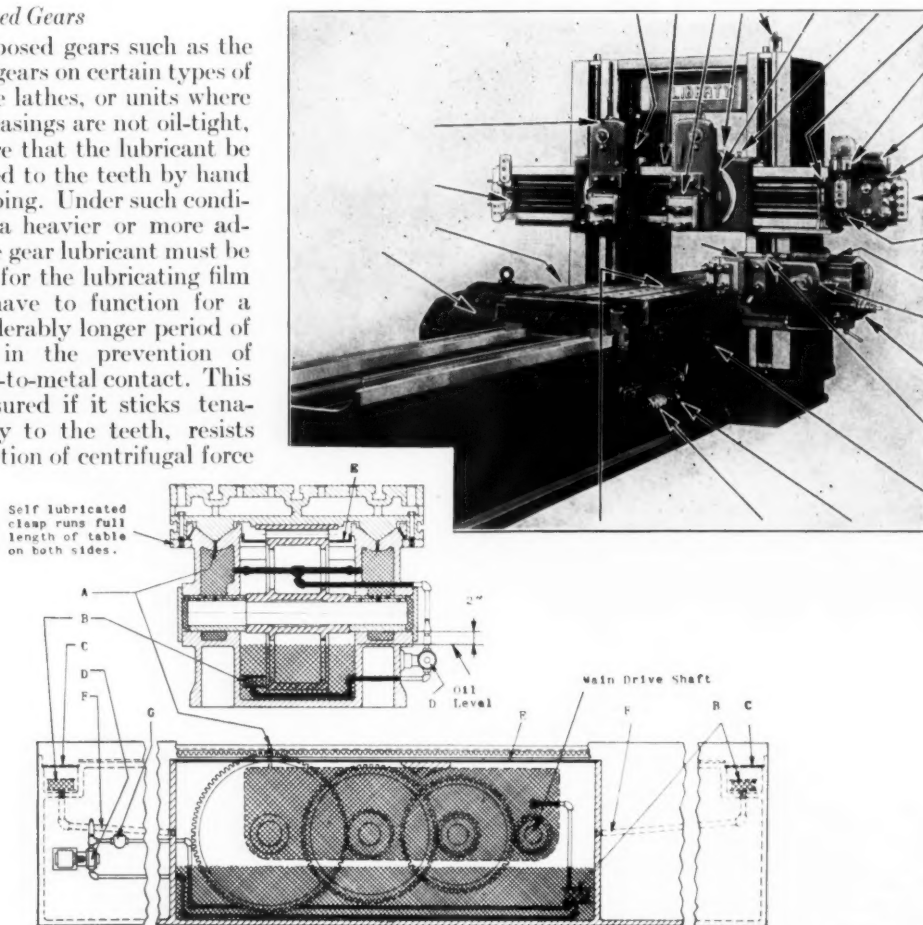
The Liberty double housing planer. Arrows on the photo show lubrication fittings; the line sketch shows details of the Liberty force feed lubrication system for bed gearing, bearings and Vees: A—Opening from oil reservoir to vee; B—Strainer to filter oil; C—Strainer screen to catch large chips or dirt; D—Motorized oil pump; E—Sheet iron covers protecting gearing; F—Return pipe lines to main reservoir; G—Oil filter.
